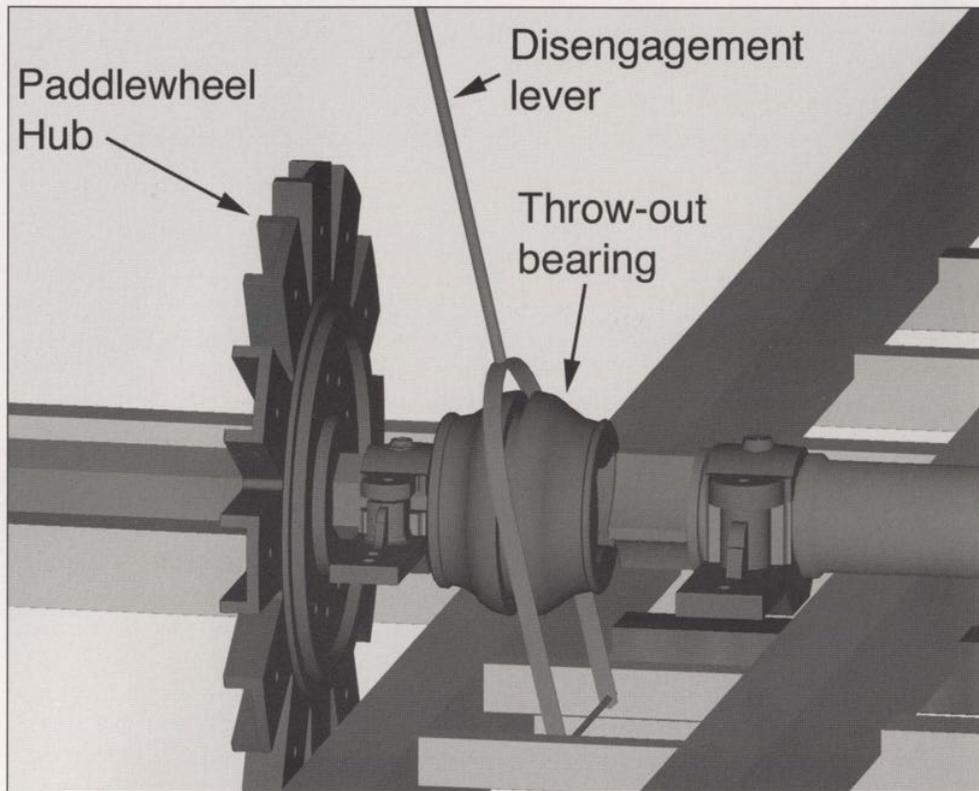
Reconstruction of the throw-out bearing assembly. Pins on the inside of the curved iron strap attached to the lever engage the notch in the throw-out bearing. Moving the lever in an outboard direction disengages the paddlewheels from the main axle. Image: G. Grieco
